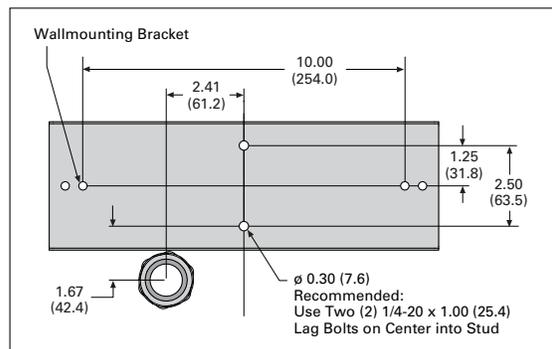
Wallmount Bracket Layout—Back Wire and Bottom Conduit Entry
